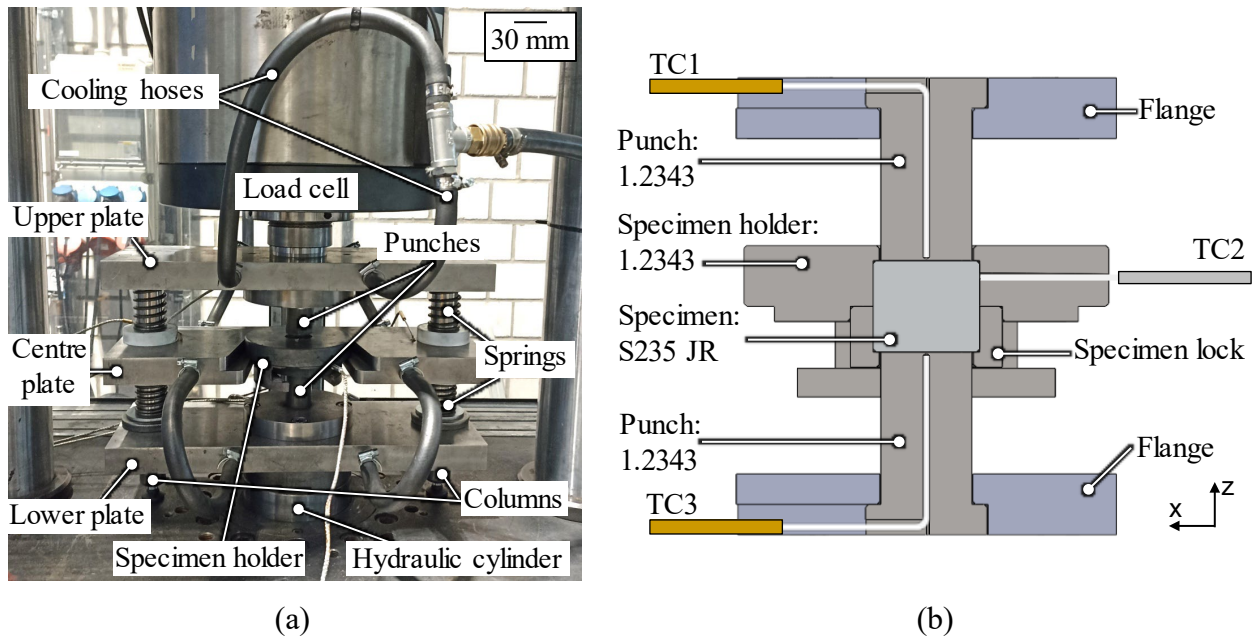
(a) Test set-up for determining the HTC under forging-relevant process parameters according to Mohnfeld et al. with extended cooling system, (b) Schematic cross-sectional view of the active components of the experimental setup [12].
